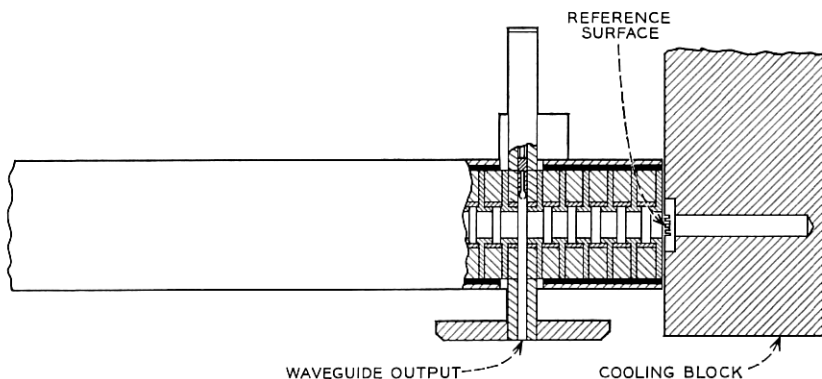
Cross section of the magnet stack, the cooling block assembly.
